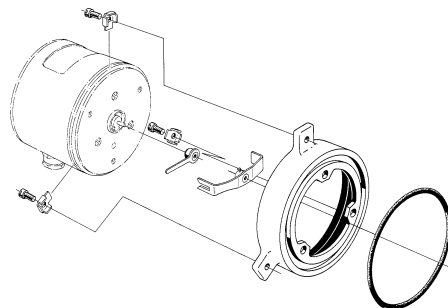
Accessory kit for pressure gauge mounting (see "Feature 12.")
